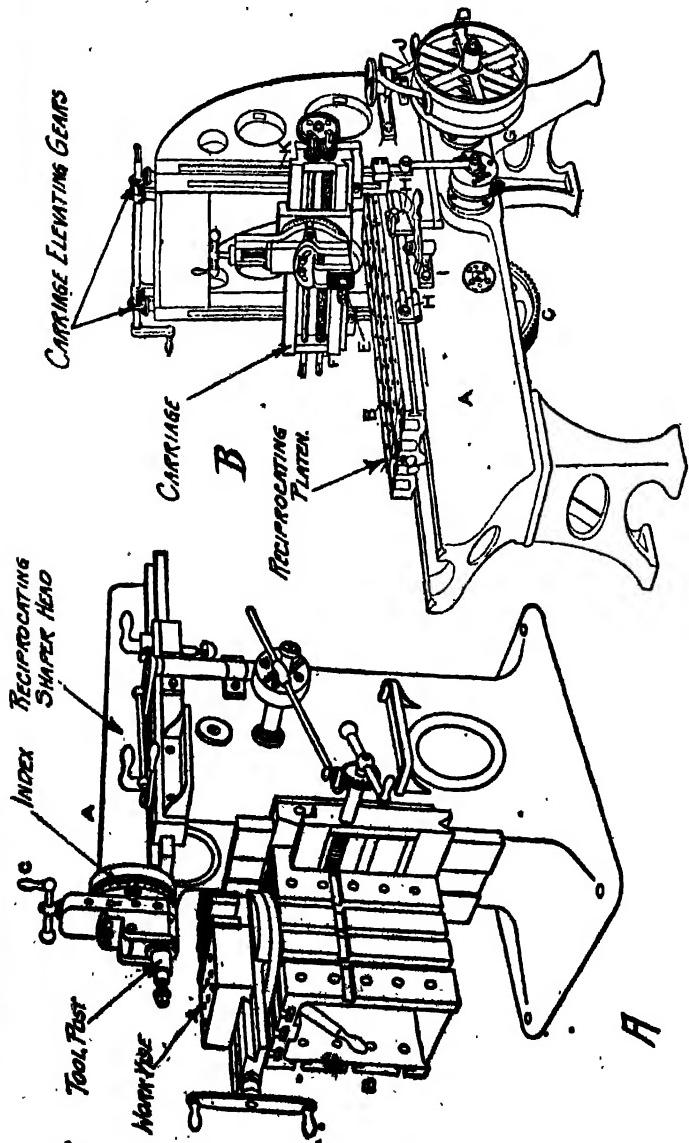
The Shaper and Planer, Two Machine Tools of Utility in Motor Car Restoration.
